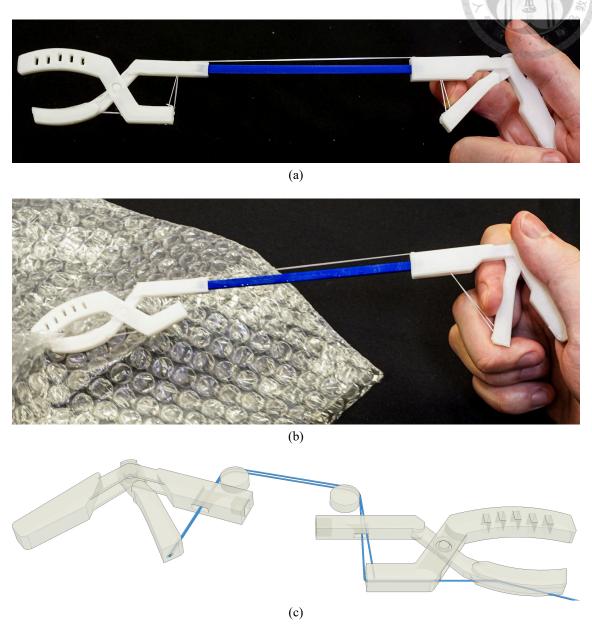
Our grabber device was printed as two plastic parts connected by thread and which, after printing, are rigidly connected using an inserted stick.
